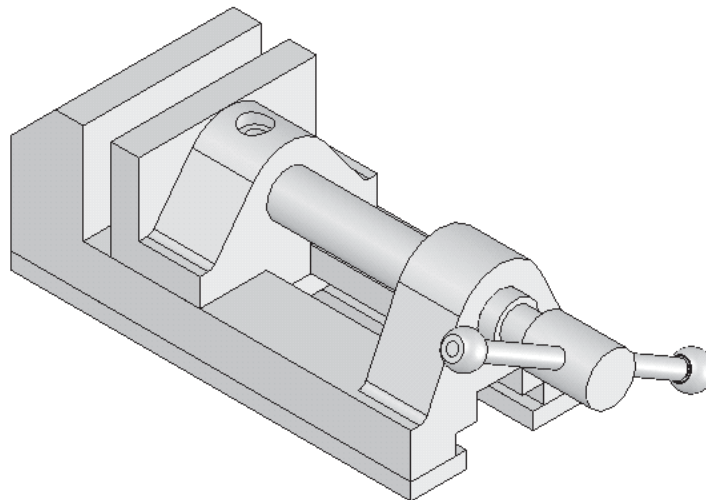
Assembly after assembling the Vice Body, Vice Jaw, Jaw Screw, Screw Bar, Clamping Plate, Base Plate, and Bar Globes
